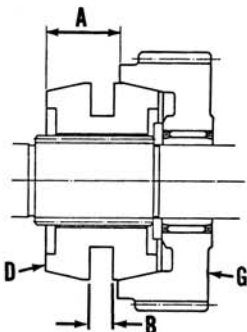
To measure drive cone (D) contact face wear, place forward/reverse gear (G) on appropriate contact face and measure distance (A). Shifter slot measurement is taken at point (B).
